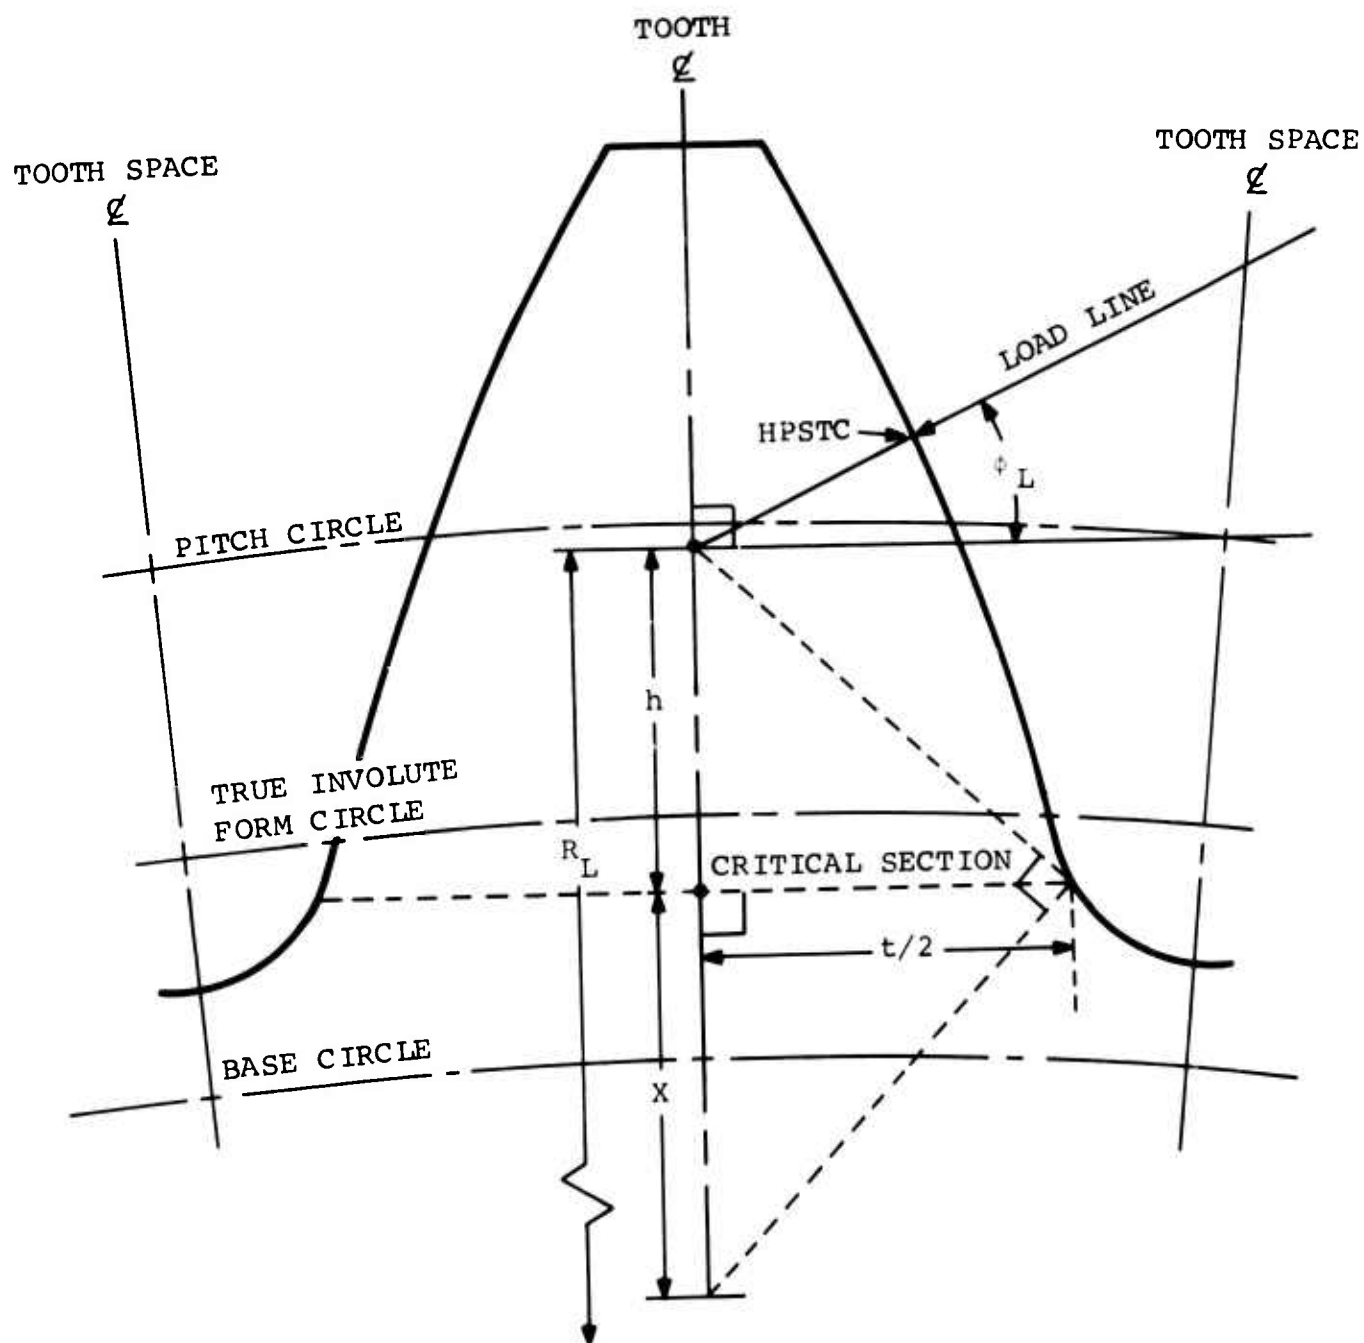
Bending Stress of Baseline Standard Involute Helical Gears
